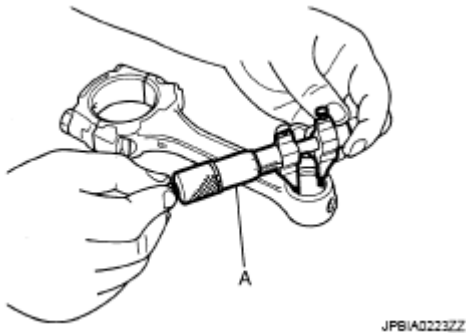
Measuring Inner Diameter Of Connecting Rod Bushing
